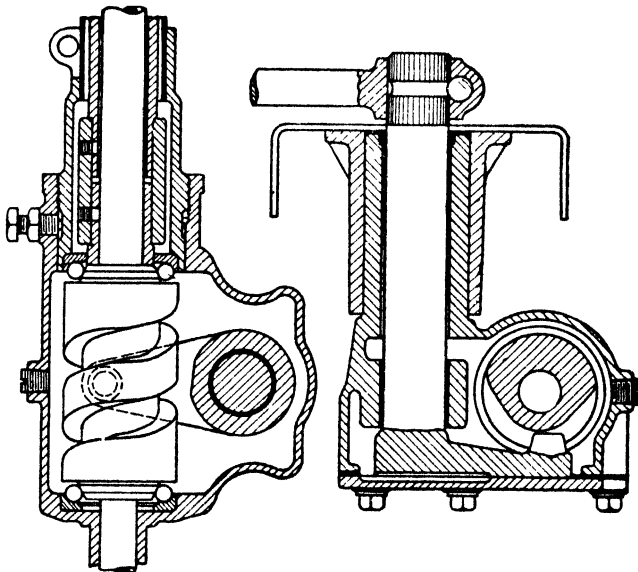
ROSS CAM-AND-LEVER STEERING GEAR.
